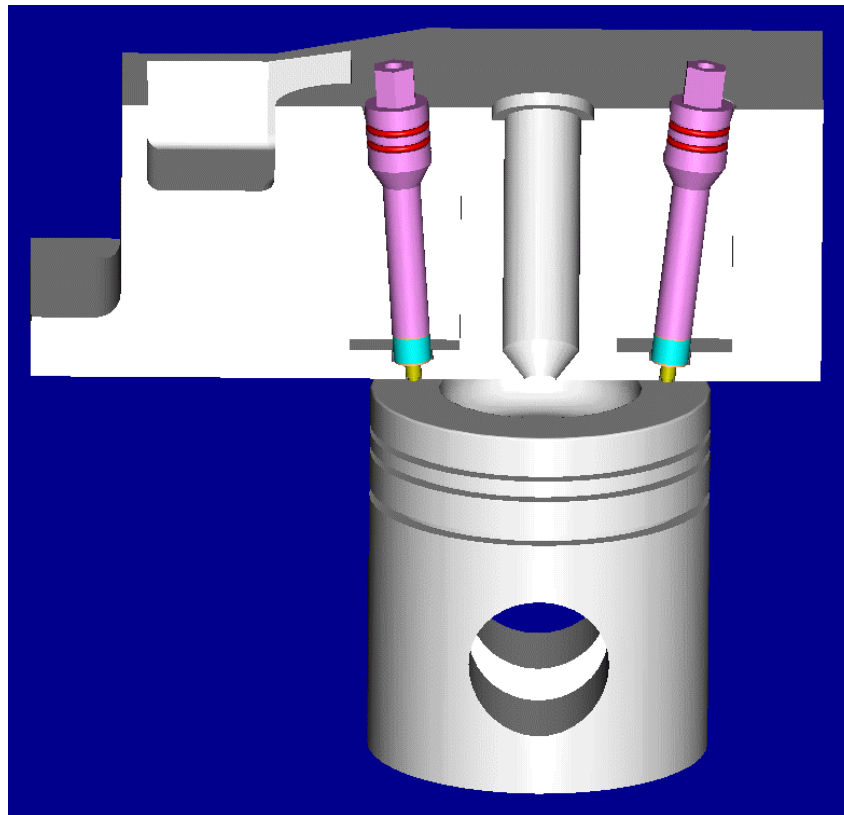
Spark Plug Locations in Outer Part of Combustion Chamber
